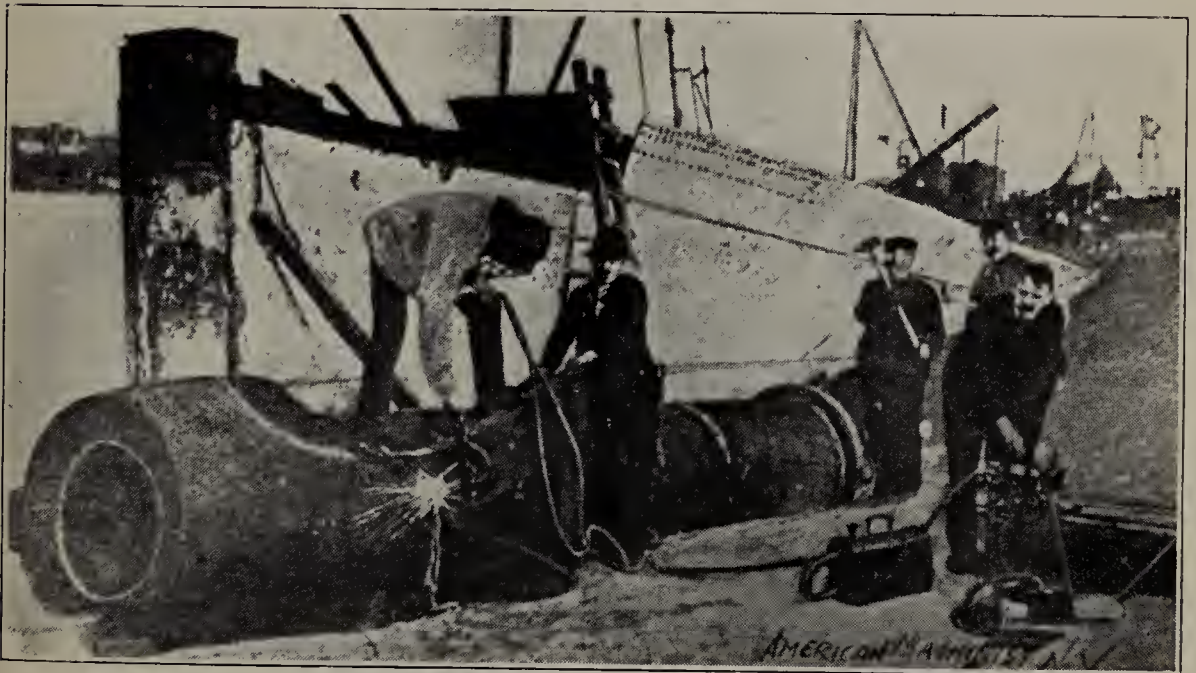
CUTTING CAST-STEEL FRAME FOR PROPELLER SHAFT
